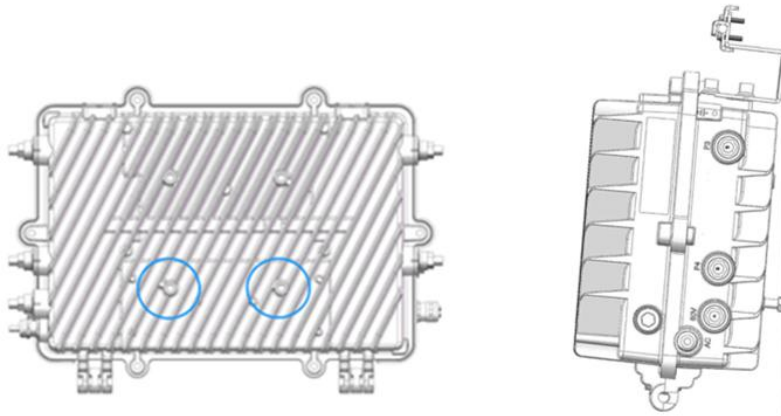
Location of heat dissipation auxiliary screw hole
